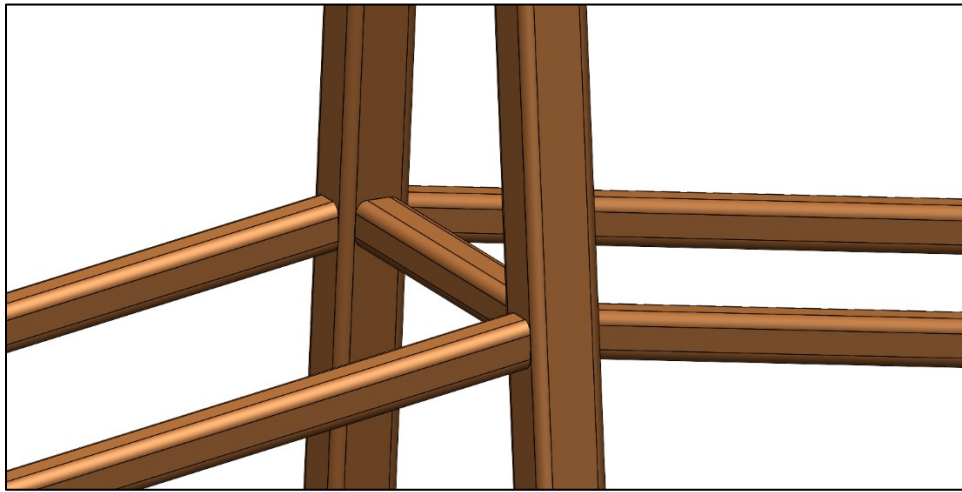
Middle Ring Welded Connection from Weldment Assembly
